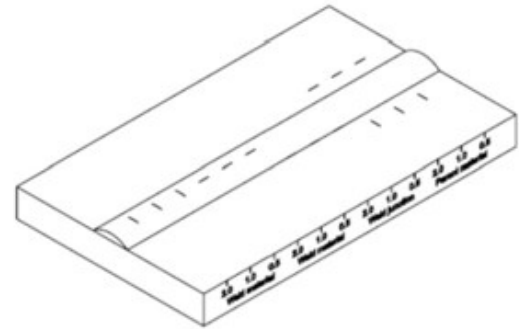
Schematic of Calibration plate with weld and notches
